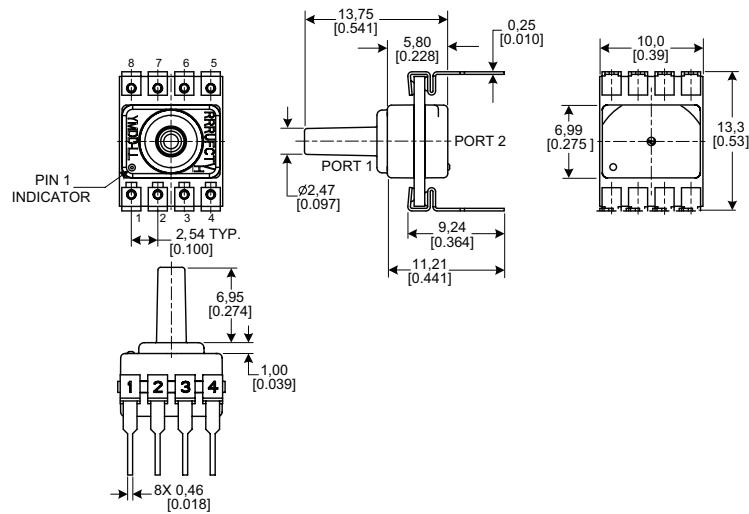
DIP Package Dimensional Drawings (for reference only: mm [in])
